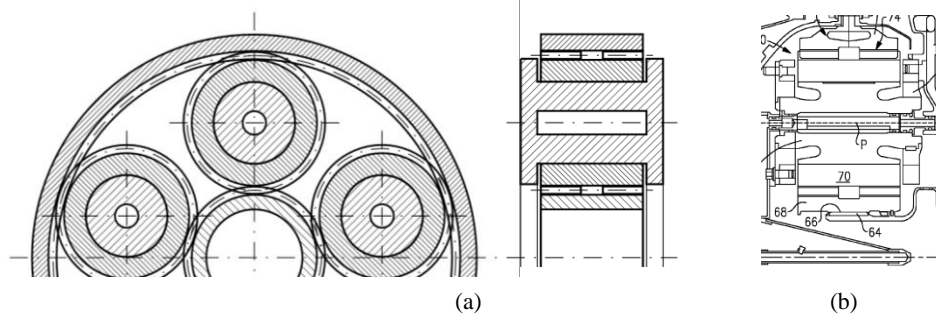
Generic modelling of the planet carrier in GtGearbox (a) based on published illustrations of modern aero engine gearboxes (b) [17]
